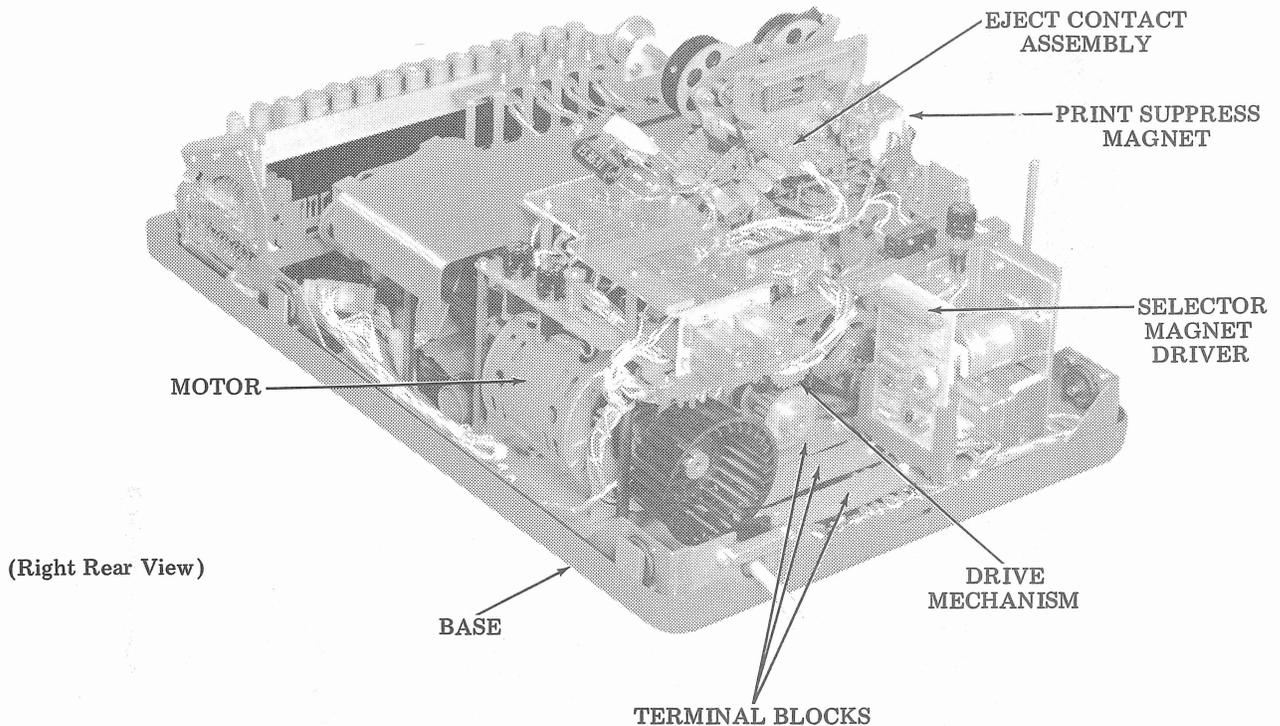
35 Edge Punched Card Typing Reperforator Set Without Cover Assembly
